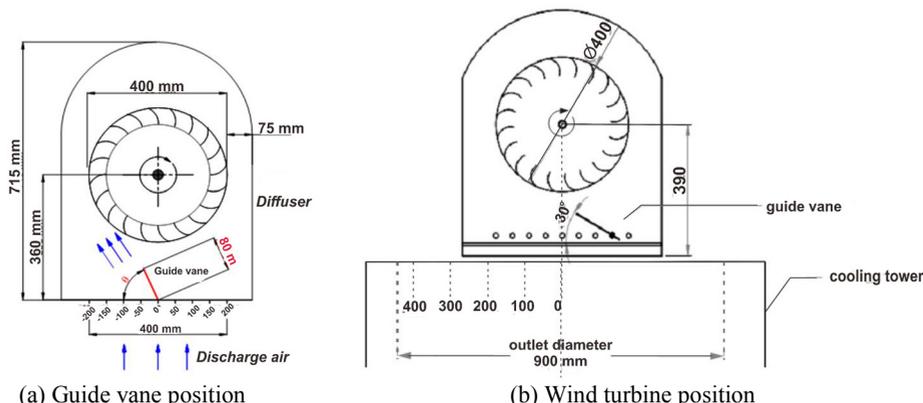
Guide vane position and turbine position about the center of cooling tower fan.
